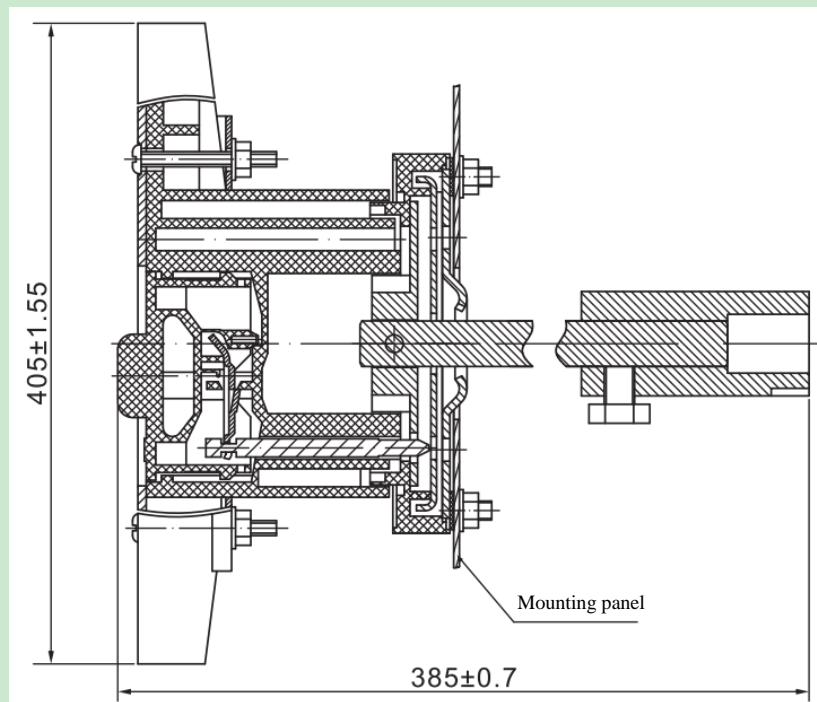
Dimension drawings of A type out-of-cabinet handle
